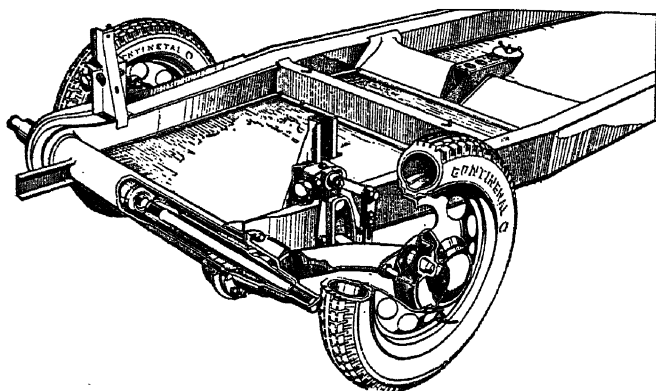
Adler Junior Rear Torsion Bar Springing System.
